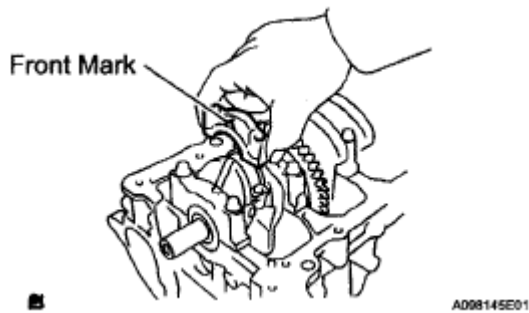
Checking Front Mark Of Connecting Rod Cap
